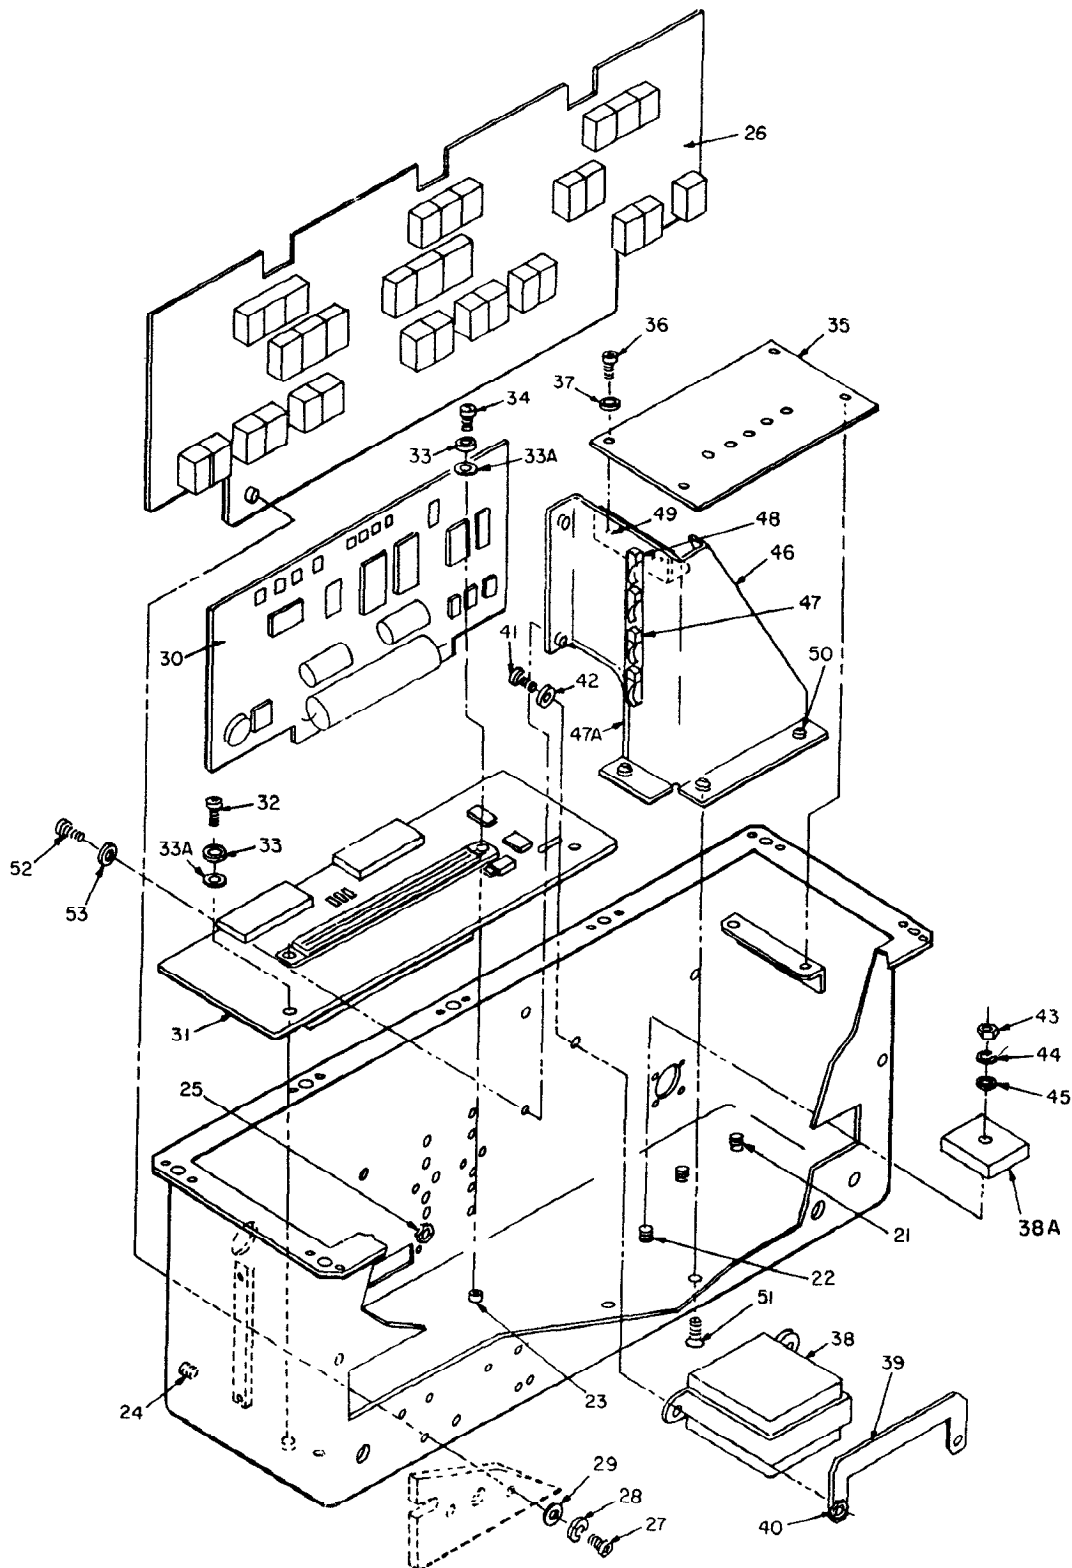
Digital Display Indicator Assembly (Sheet 2 of 3)
